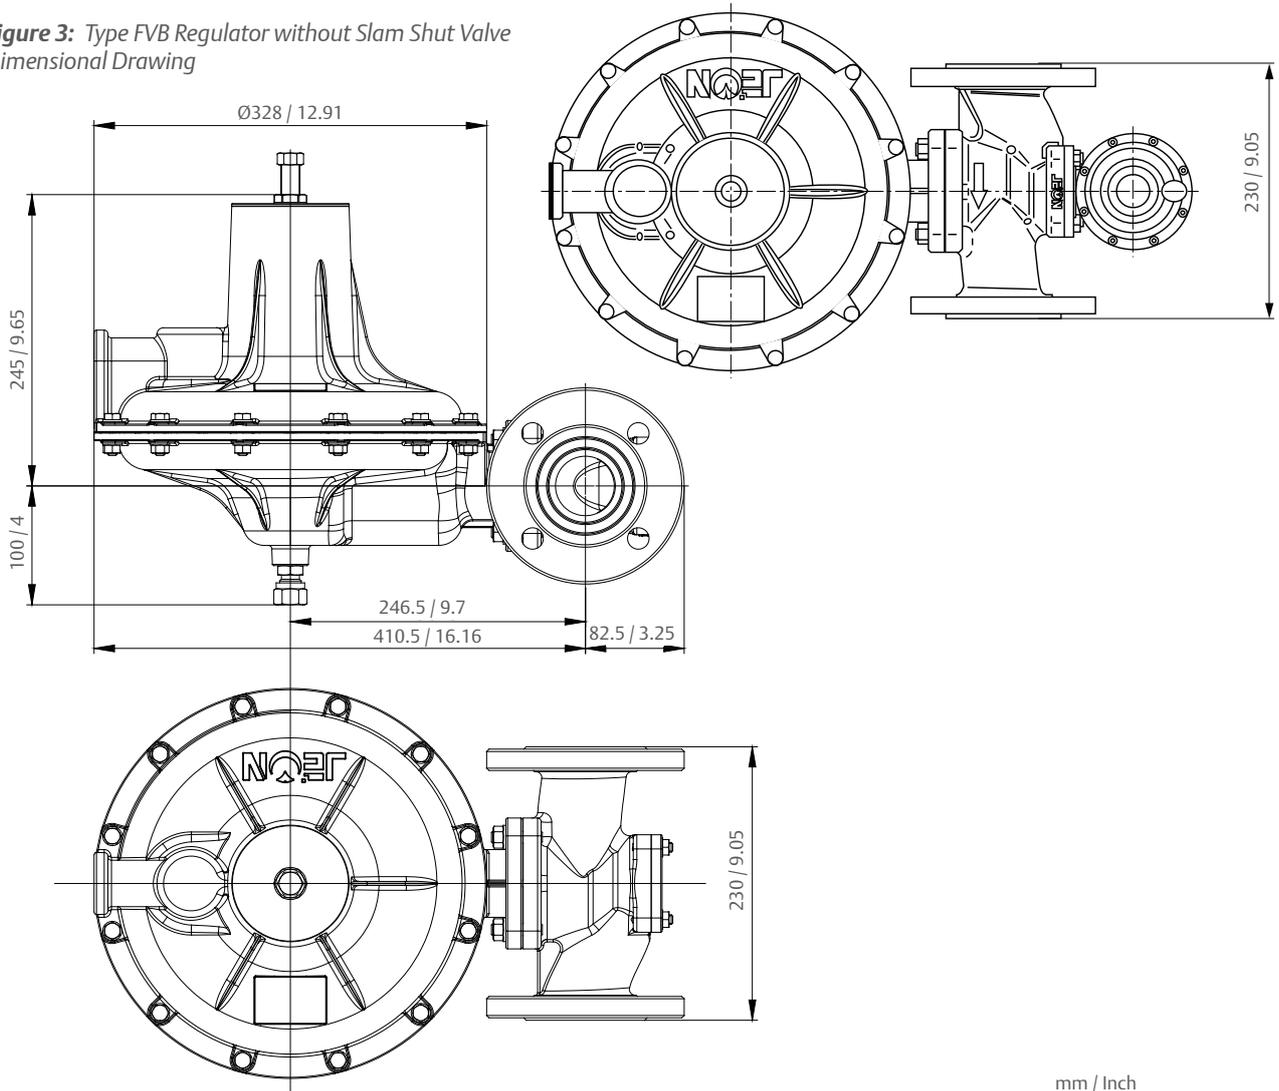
Type FVB Regulator without Slam Shut Valve Dimensional Drawing
